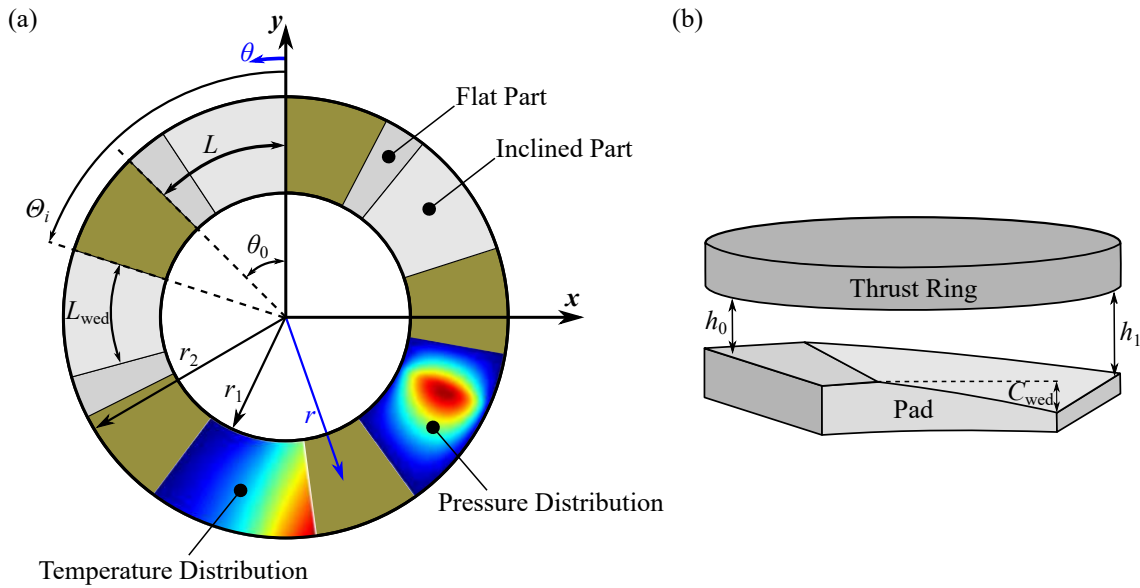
5-pad thrust bearing: (a) bearing geometry, (b) pad geometry
